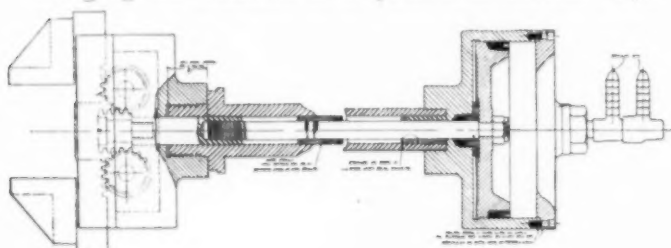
ASSEMBLY OF TWO-JAW UNIVERSAL CHUCK AND OPERATING AIR CYLINDER ON LATHE SPINDLE.
